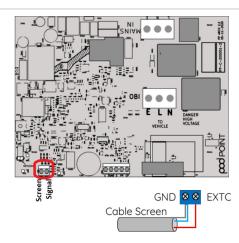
PCBA Clamp Connection - Location CON9/J301
